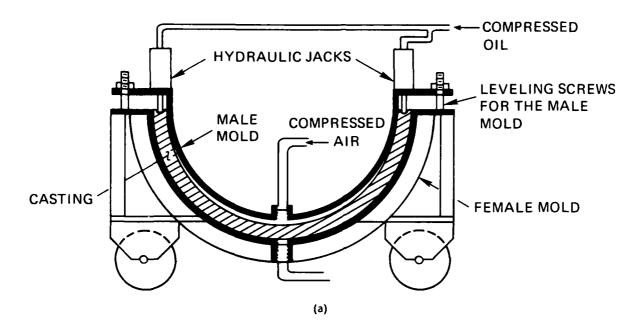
Completed mold assembly with hydraulic jacks and wheels in place.
